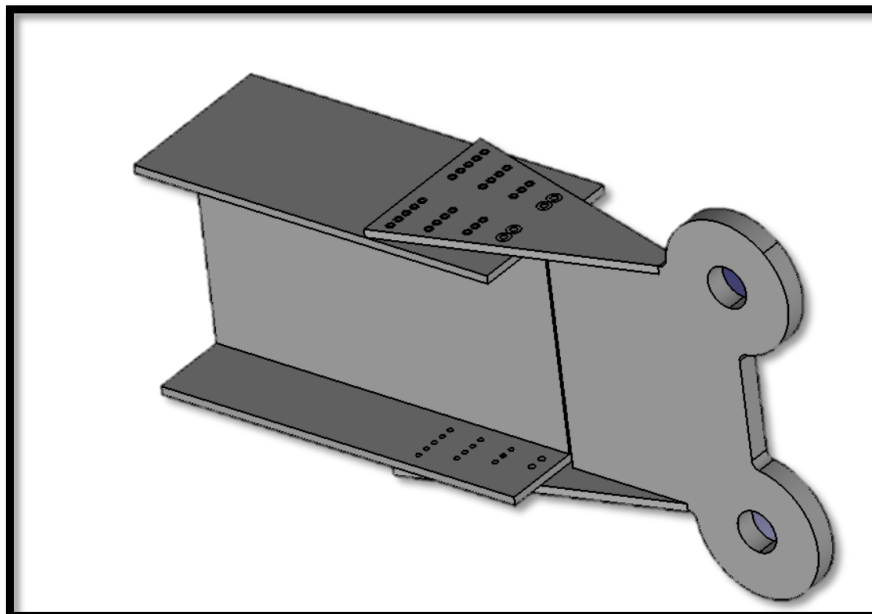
Assembled section of Lug bracket and I-Spar beam
